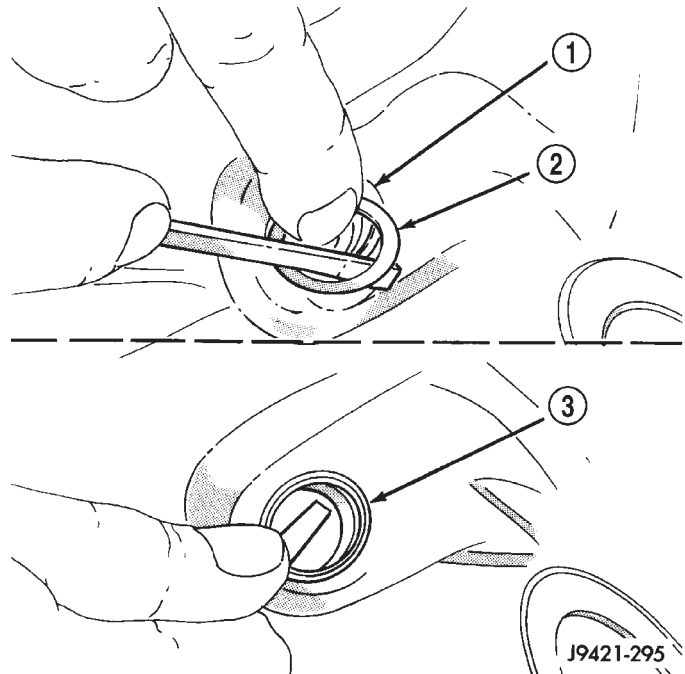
Removing Sector Shaft O-Ring And Retainer
